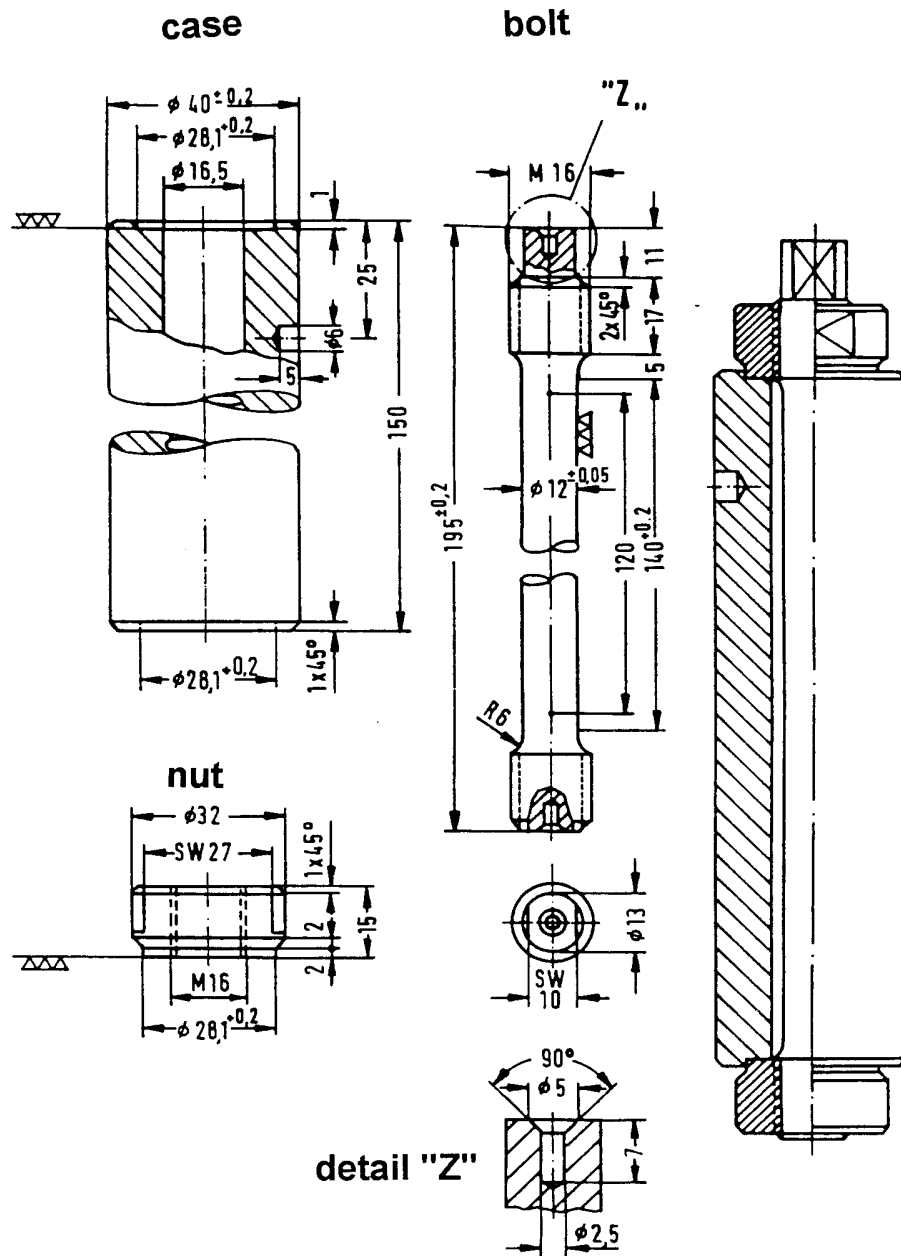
Shape of the bolt, flange and nut of a model bolt type a (for mechanical extensometry)
